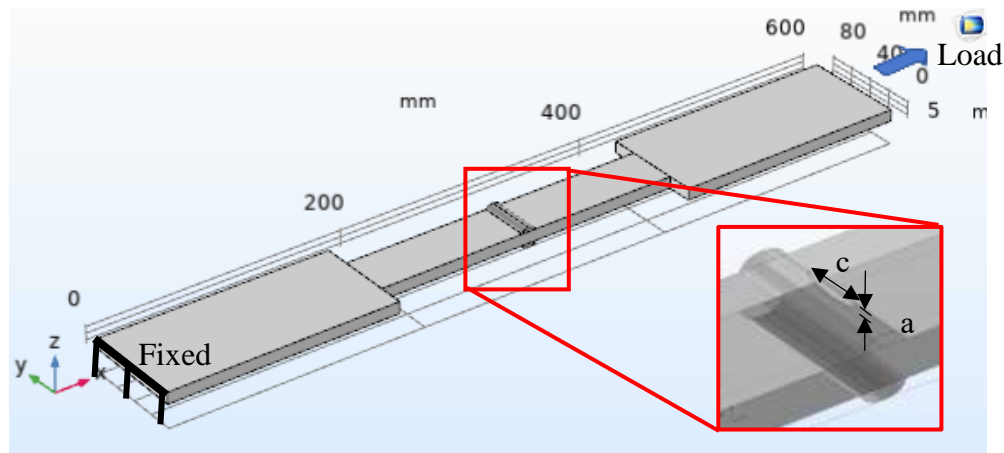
Numerical model of the butt-welded tensile specimen with cracks
